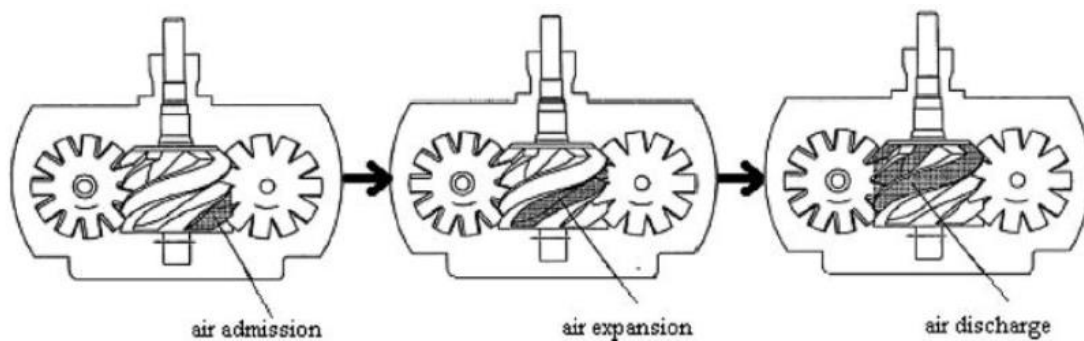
Working Mechanism of a Single Screw Expander [60]
